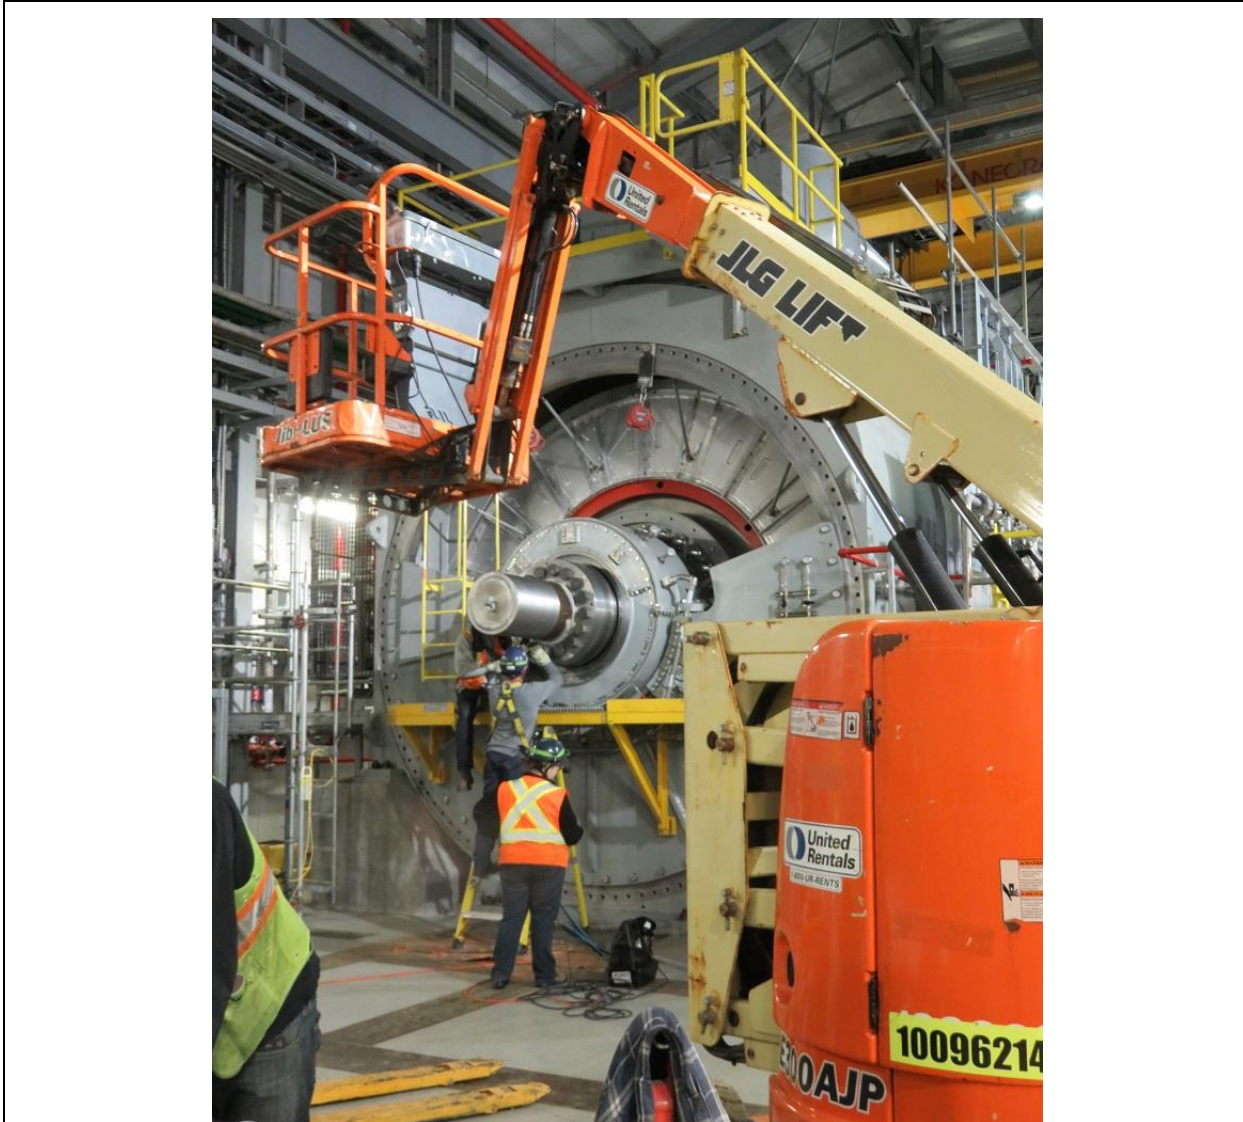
Soldiers Pond – synchronous condenser no. 2 with bearing housing removed.
